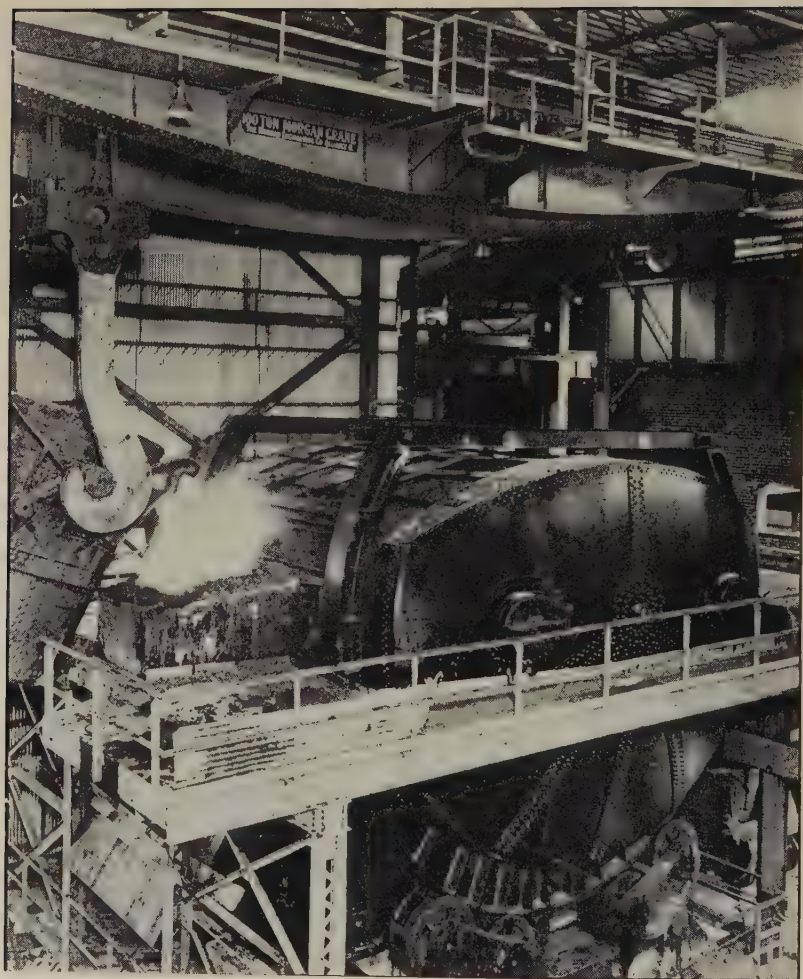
A Hot Metal Mixer Being Charged with Molten Pig Iron.
